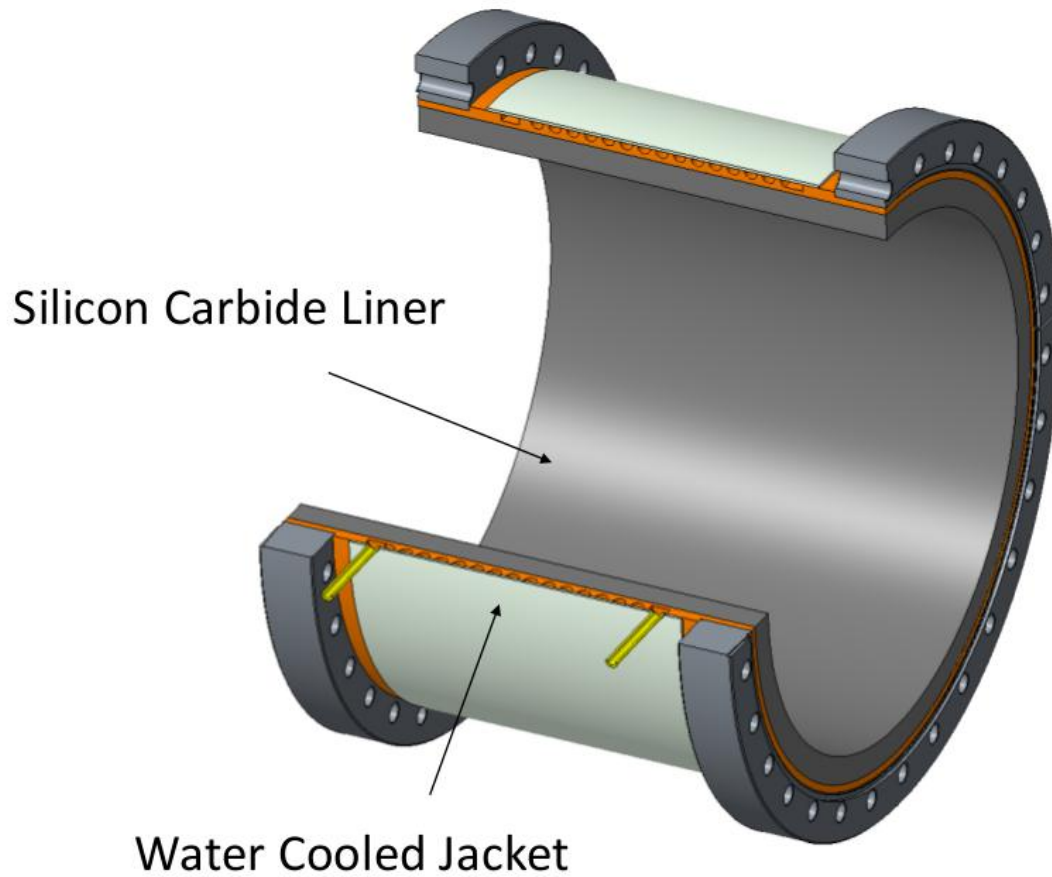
CAD model of the eRHIC SiC HOM damper (KEKB design)
